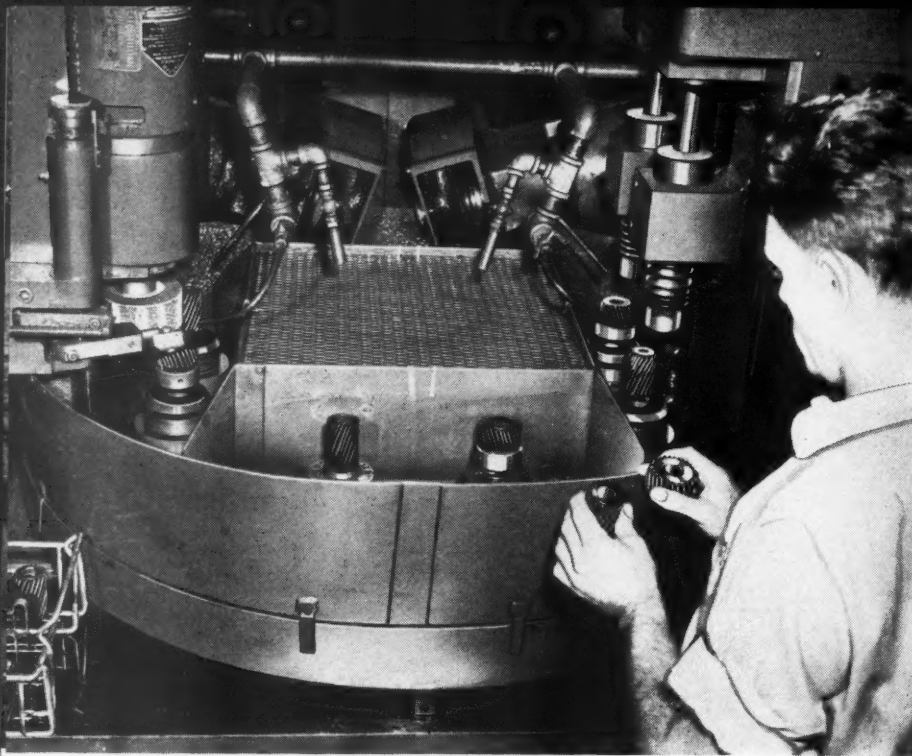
Four-station combination grinding, wire-brushing, and honing machine for finishing the hubs on both long and short transmission pinions
